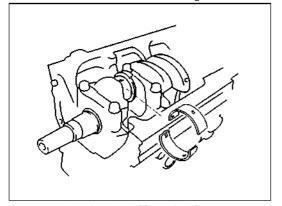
6 - 16 Clear the Connecting Rod Journal And Bearing Liner
